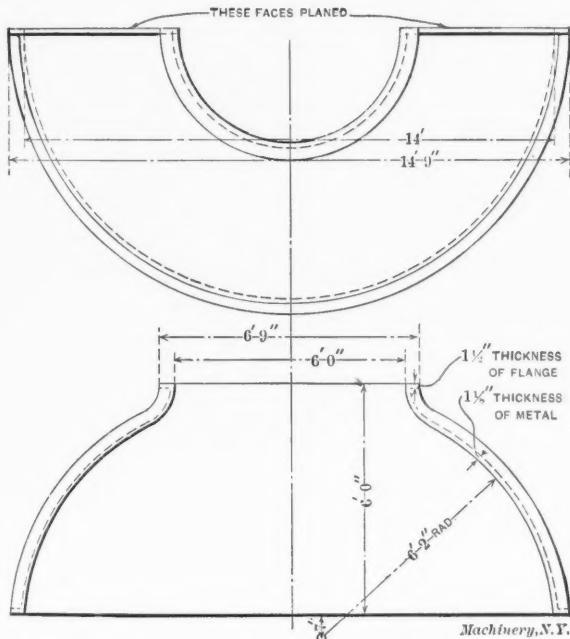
Detail of the Casting which was planed as shown in Fig. 1.
